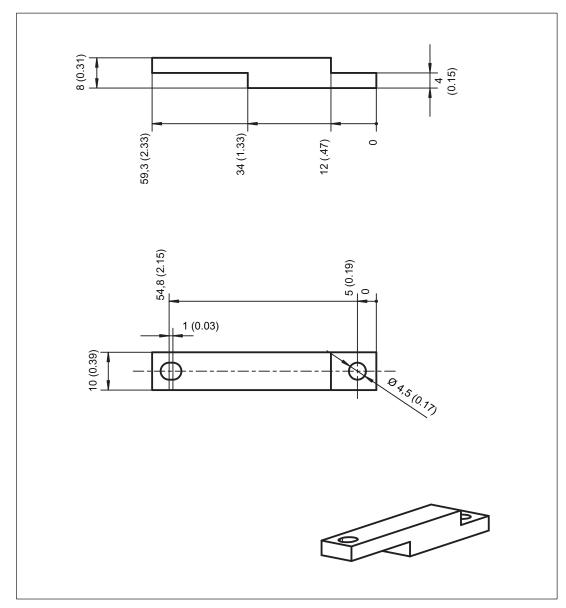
Dimension drawing of reinforced DC-link busbar 50 mm, all dimensions in mm and (inches)
